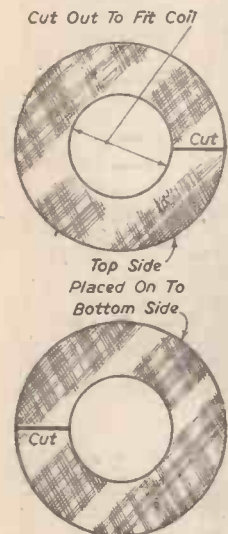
Silk sides. Cuts are spaced at 180 deg. apart to prevent spark jumping.
